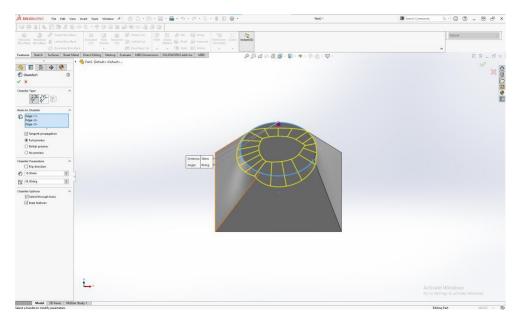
CHAMFER SHOWN IN SOLIDWORKS
